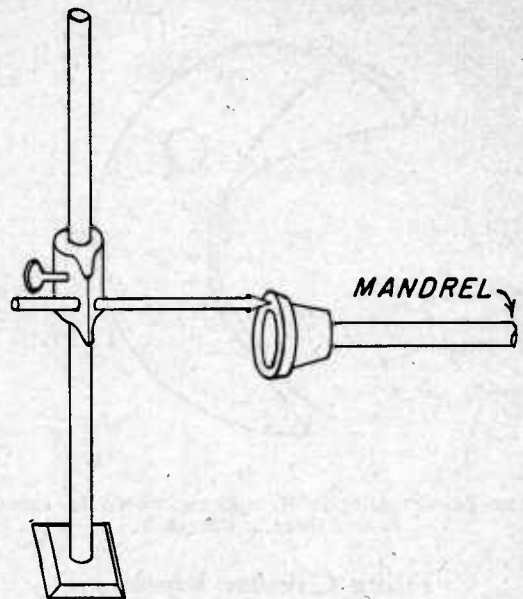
Fixed pointer for checking alinement of mandrel collar.
